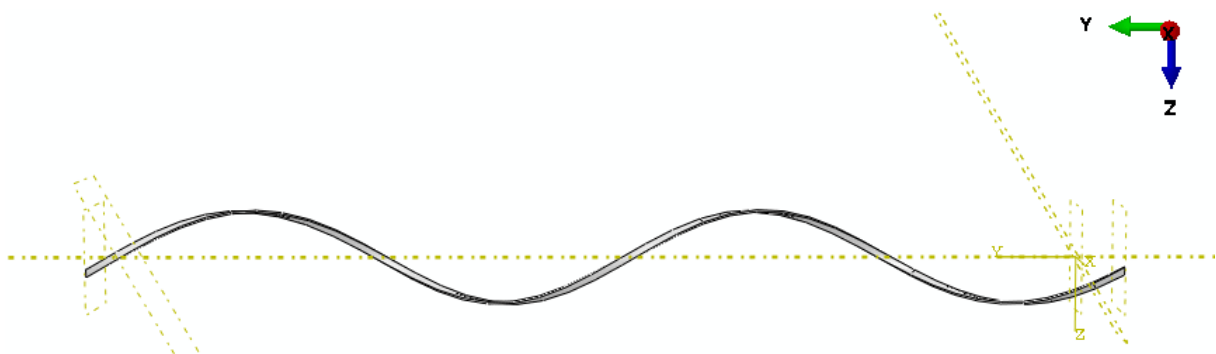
Tensile wire with datum planes in model 2.
